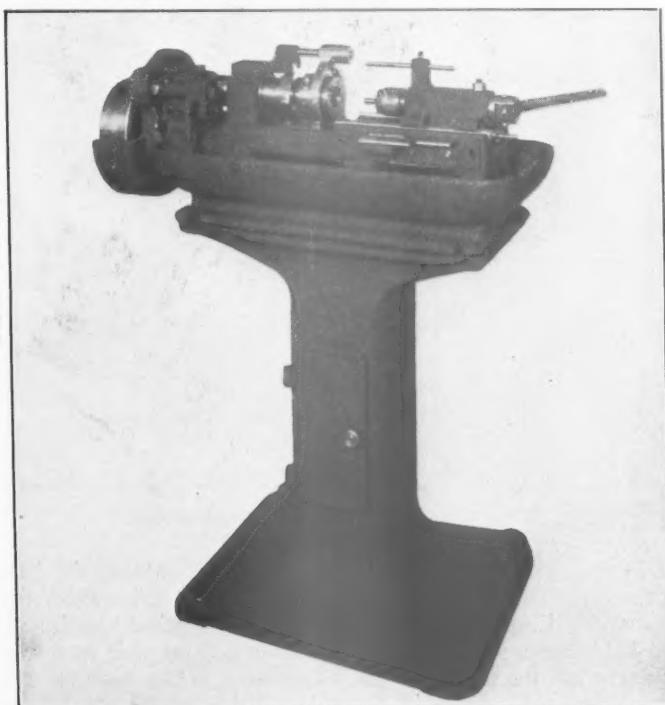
H & G Single Spindle Threading Machine, Model SS
